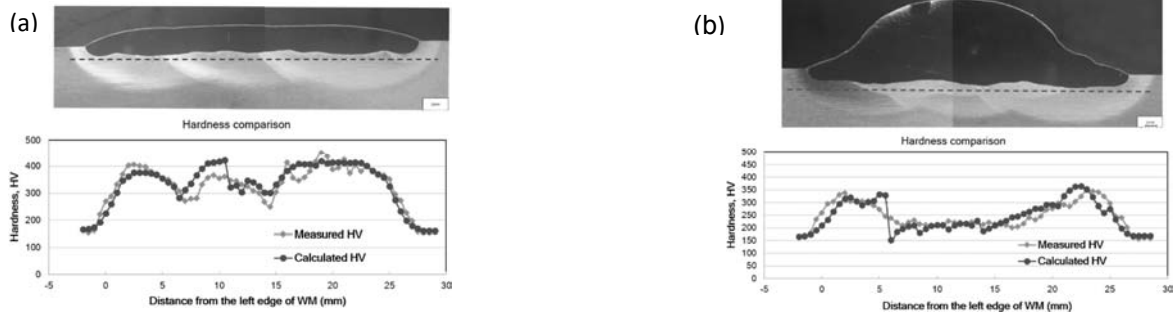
Hardness comparison after 1Layer and 6Layer welding of SM490 steel: (a) 1layer-3pass welding and (b) 6layer-21pass welding
